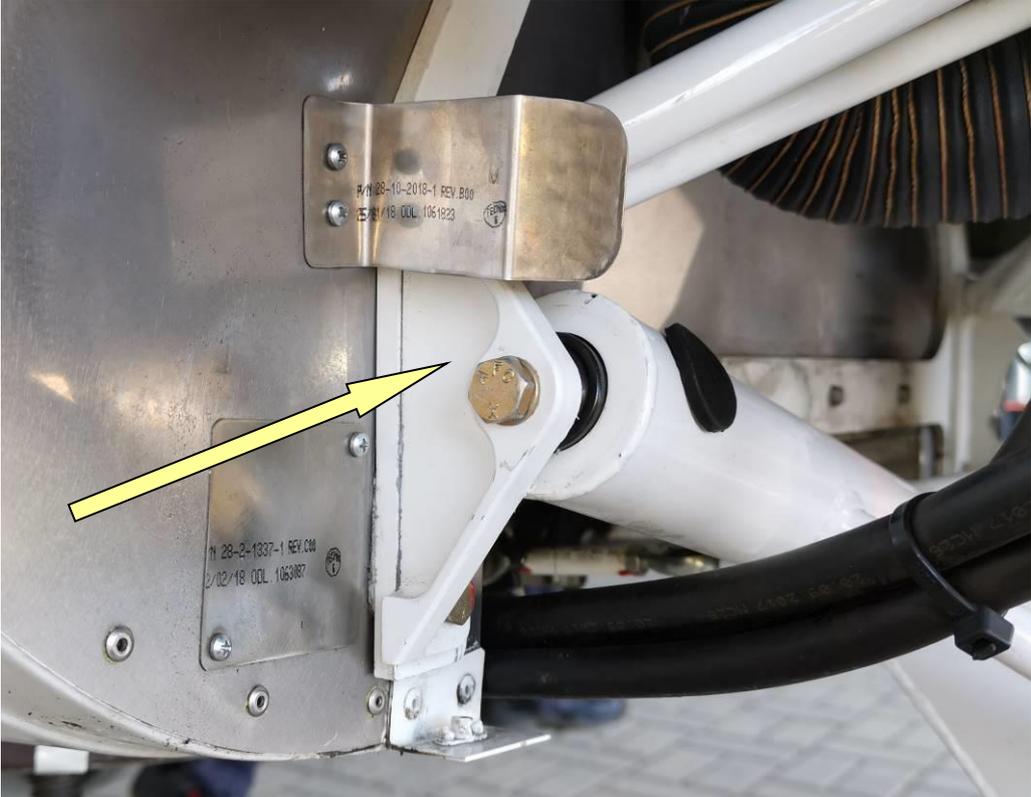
Right-hand angle flange of the longitudinal axis attachment
